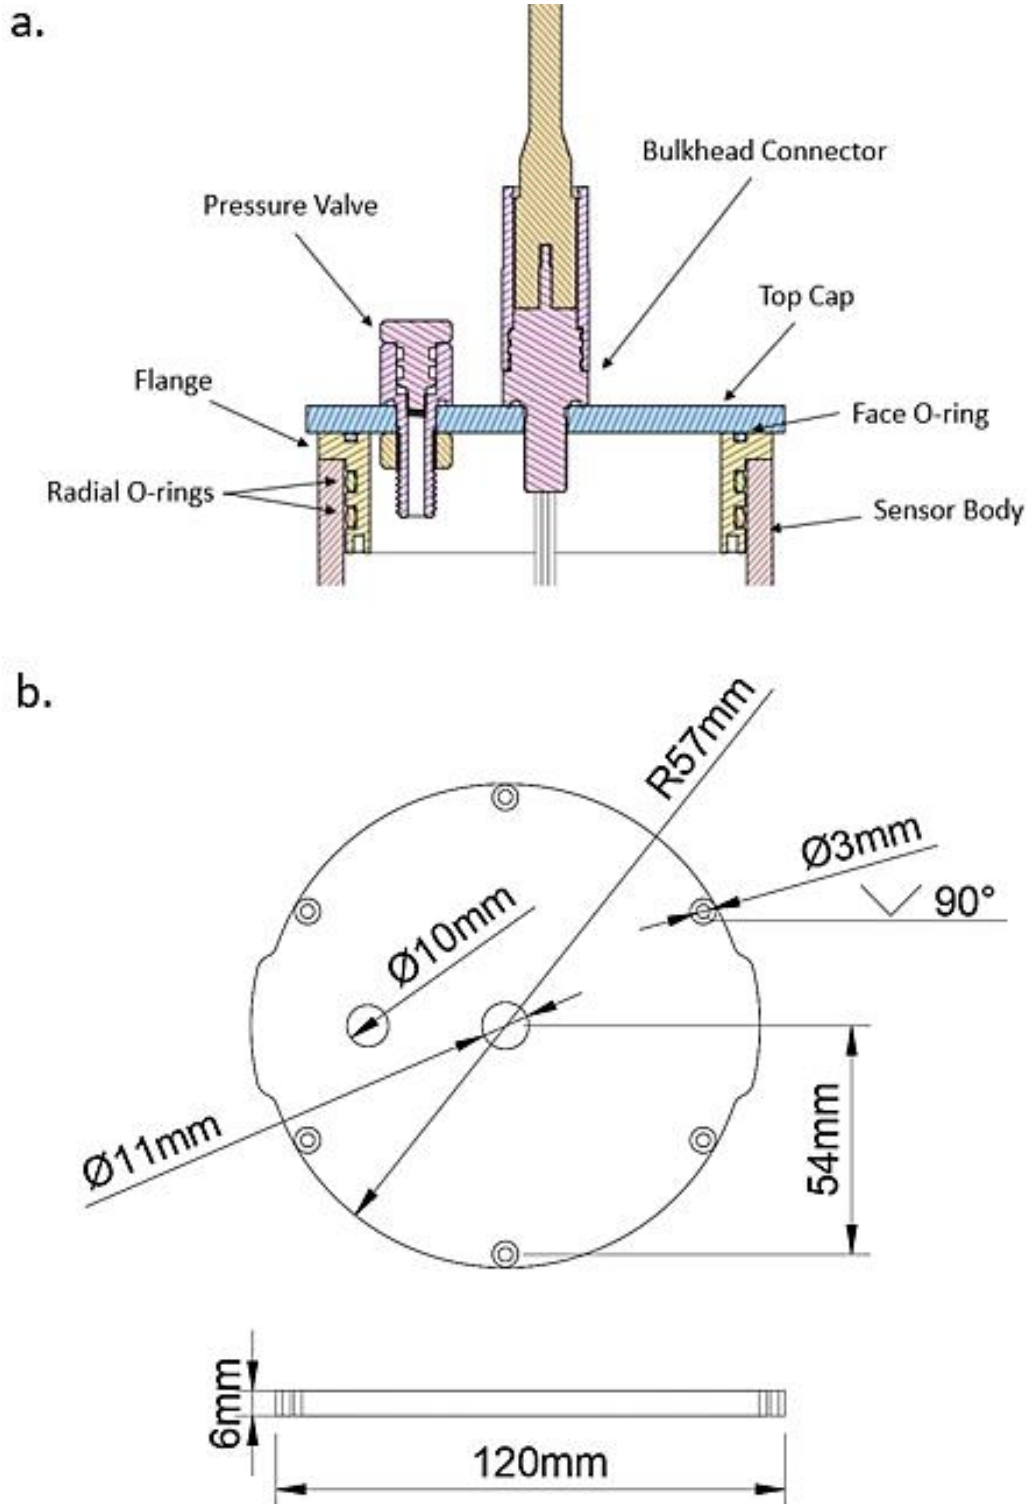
Design of the top cap and cable connector. (a) Labelled diagram of a section view of the top section of the sensor showing the valve, connector top cap, flange, and O-ring seals. (b) Dimensioned drawing of top cap design.
